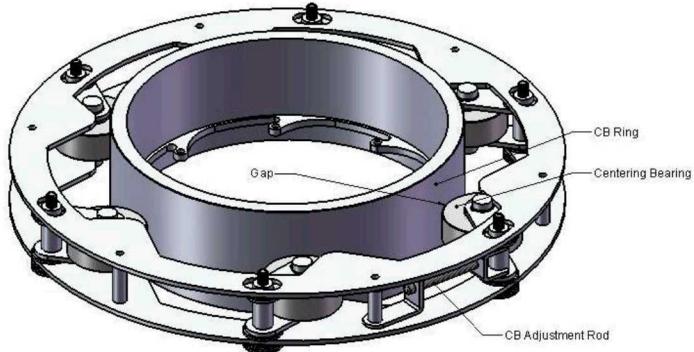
Centering bearing ring for the screw-type elevator, with bearings being shown
